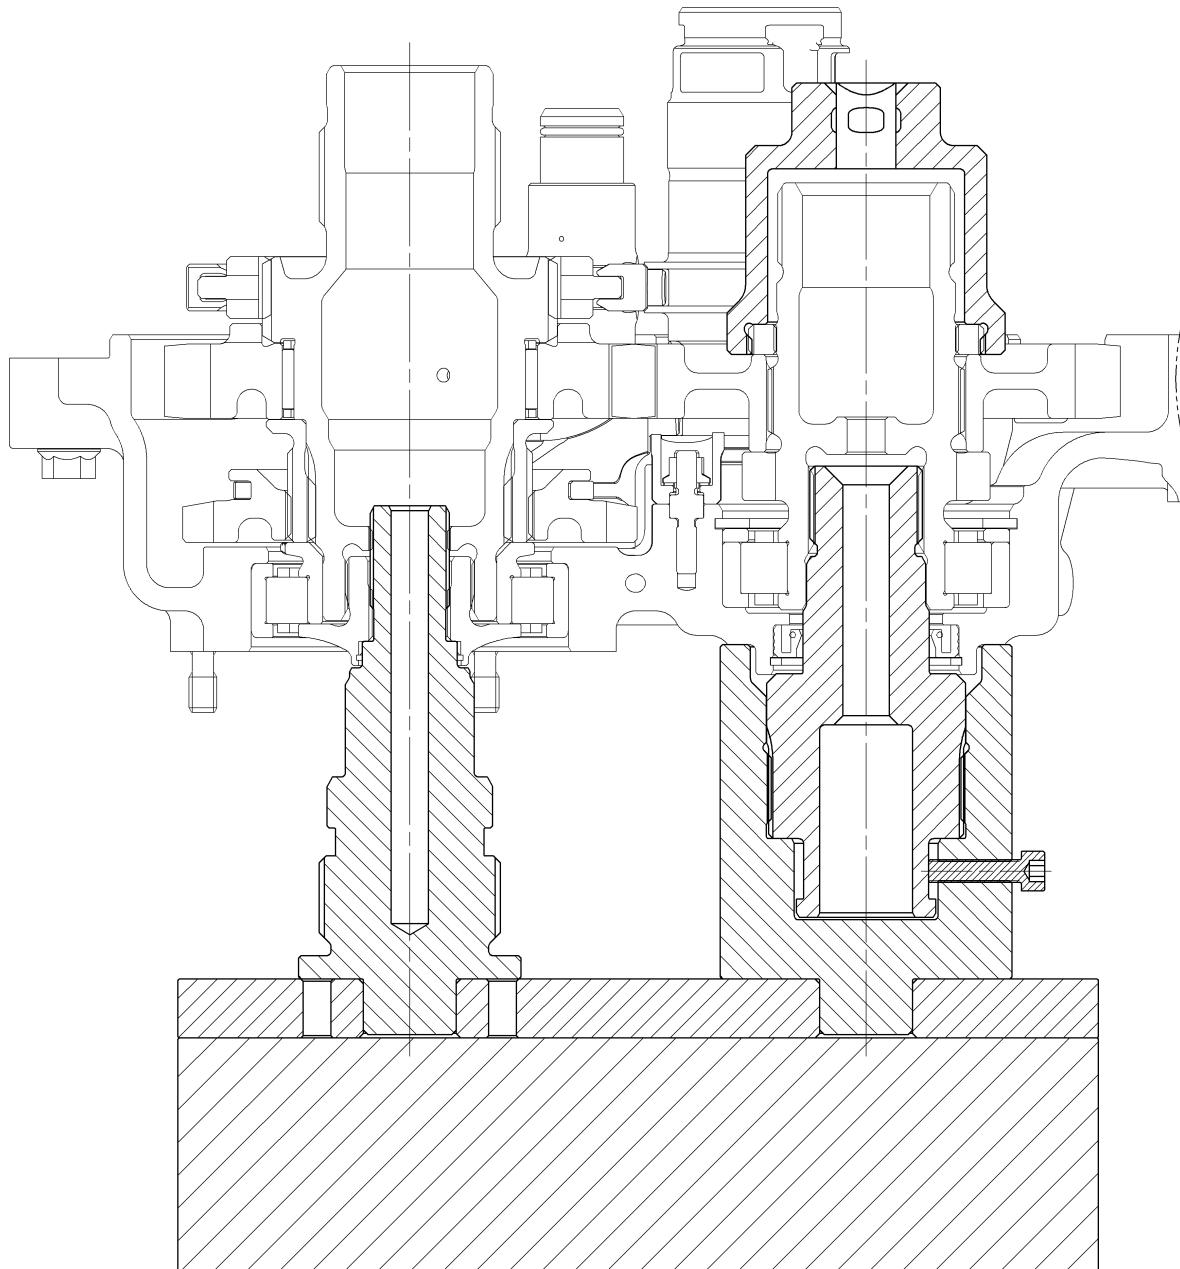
Cluster Holding Tool for Tightening/Loosening LH Layshaft Nut
